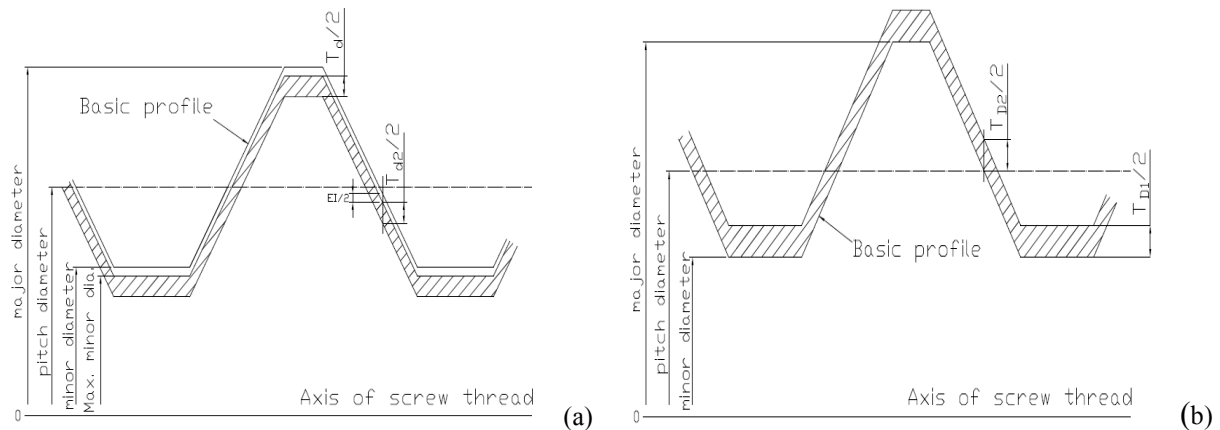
thread profiles for external and internal threads: a) tolerance position g for external threads; b) tolerance position H for internal threads
